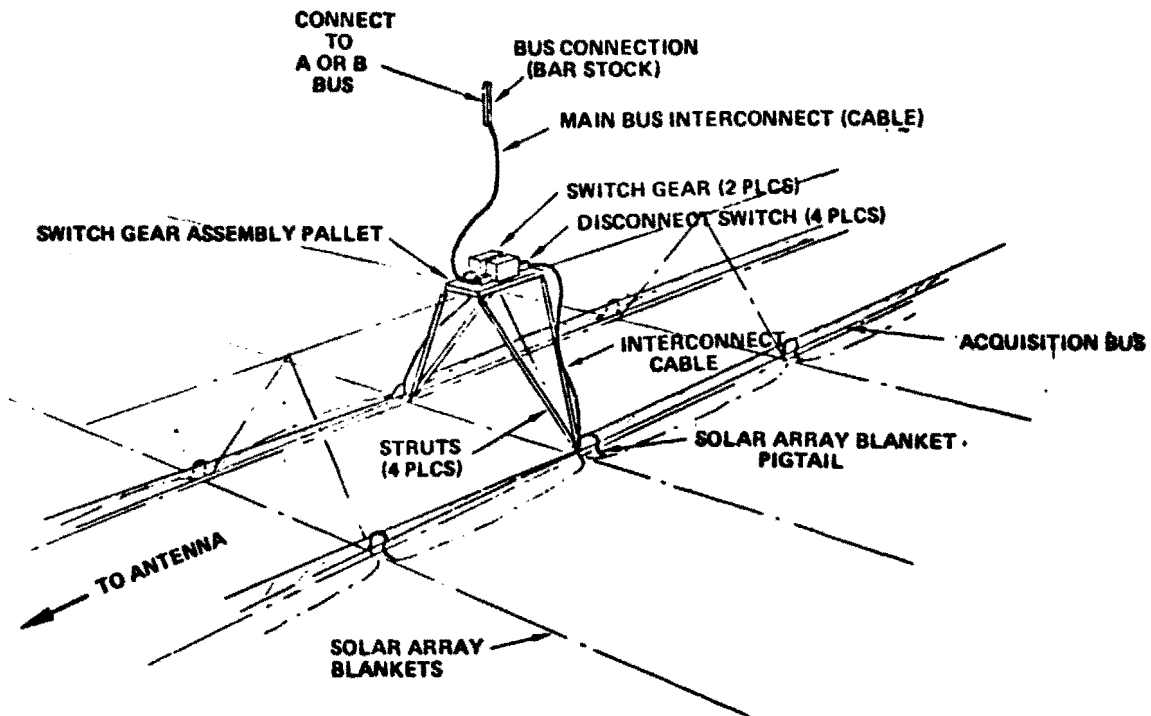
Switch Gear Assembly Installed Configuration
